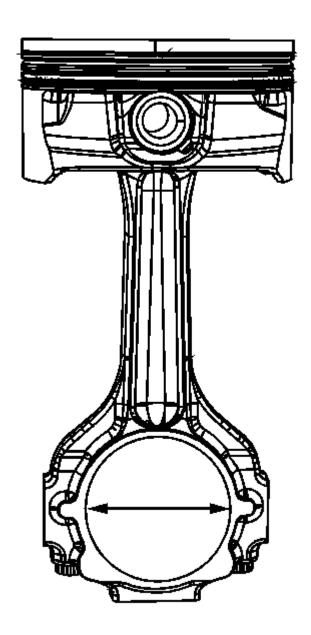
Identifying Connecting Rod Bearing Bore Courtesy of GENERAL MOTORS CORP.
